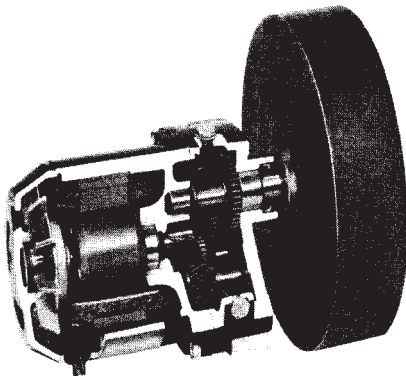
Parallel shaft gearmotor (helical and spur gearing) with inertial load on output shaft.
